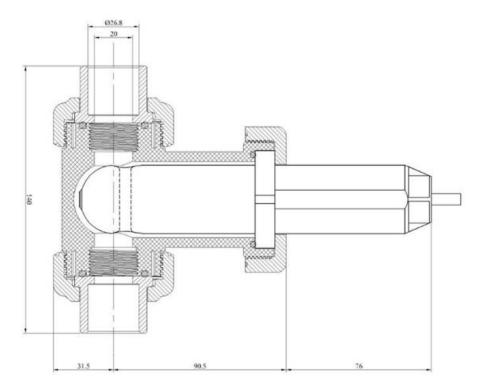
Dimension of the ST-601 sensor and the ST-001 Tee Assembly (mm)
